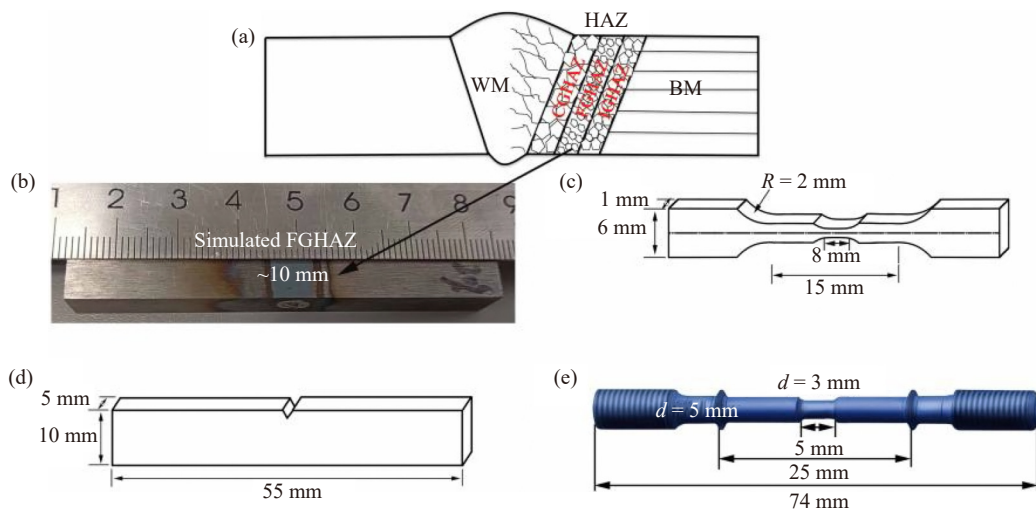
(a) Location of FGHAZ in the weldments, (b) actual NT-FG and NCT-FG steels, (c) specially designed tensile specimens, (d) Charpy specimens, and (e) specially designed creep specimens.
